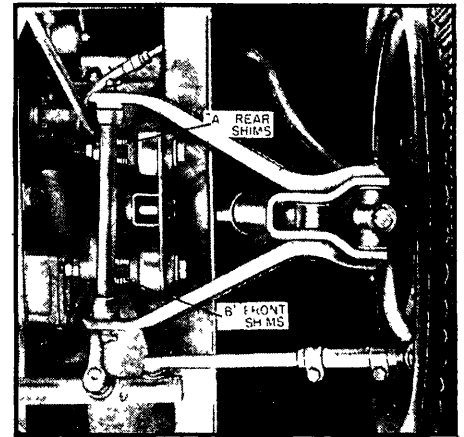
A Showing castor and camber adjusting shims at the lower control arm pivot bar mounting. 1950-52 Rambler
